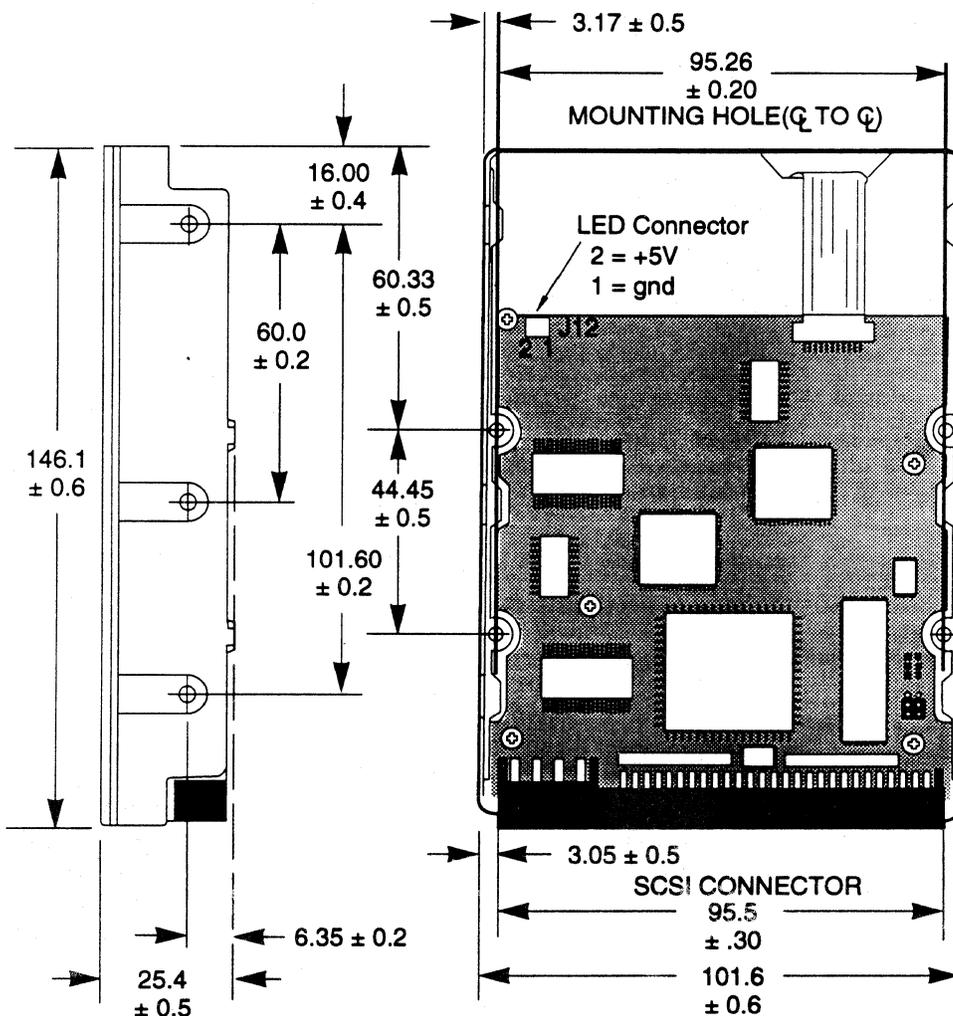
Maverick 270/540S Mounting Dimensions (in Millimeters)
